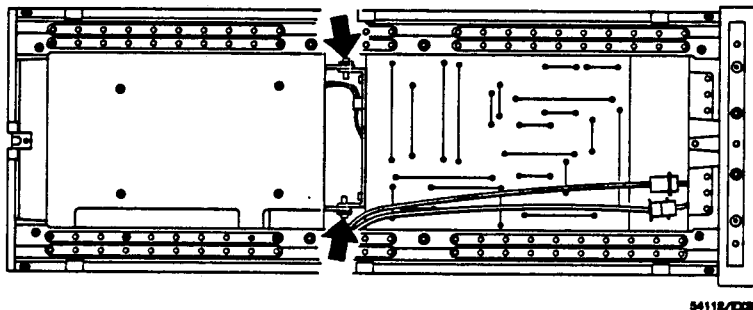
A-4. Color CRT Module, Rear Mounting Screws.
